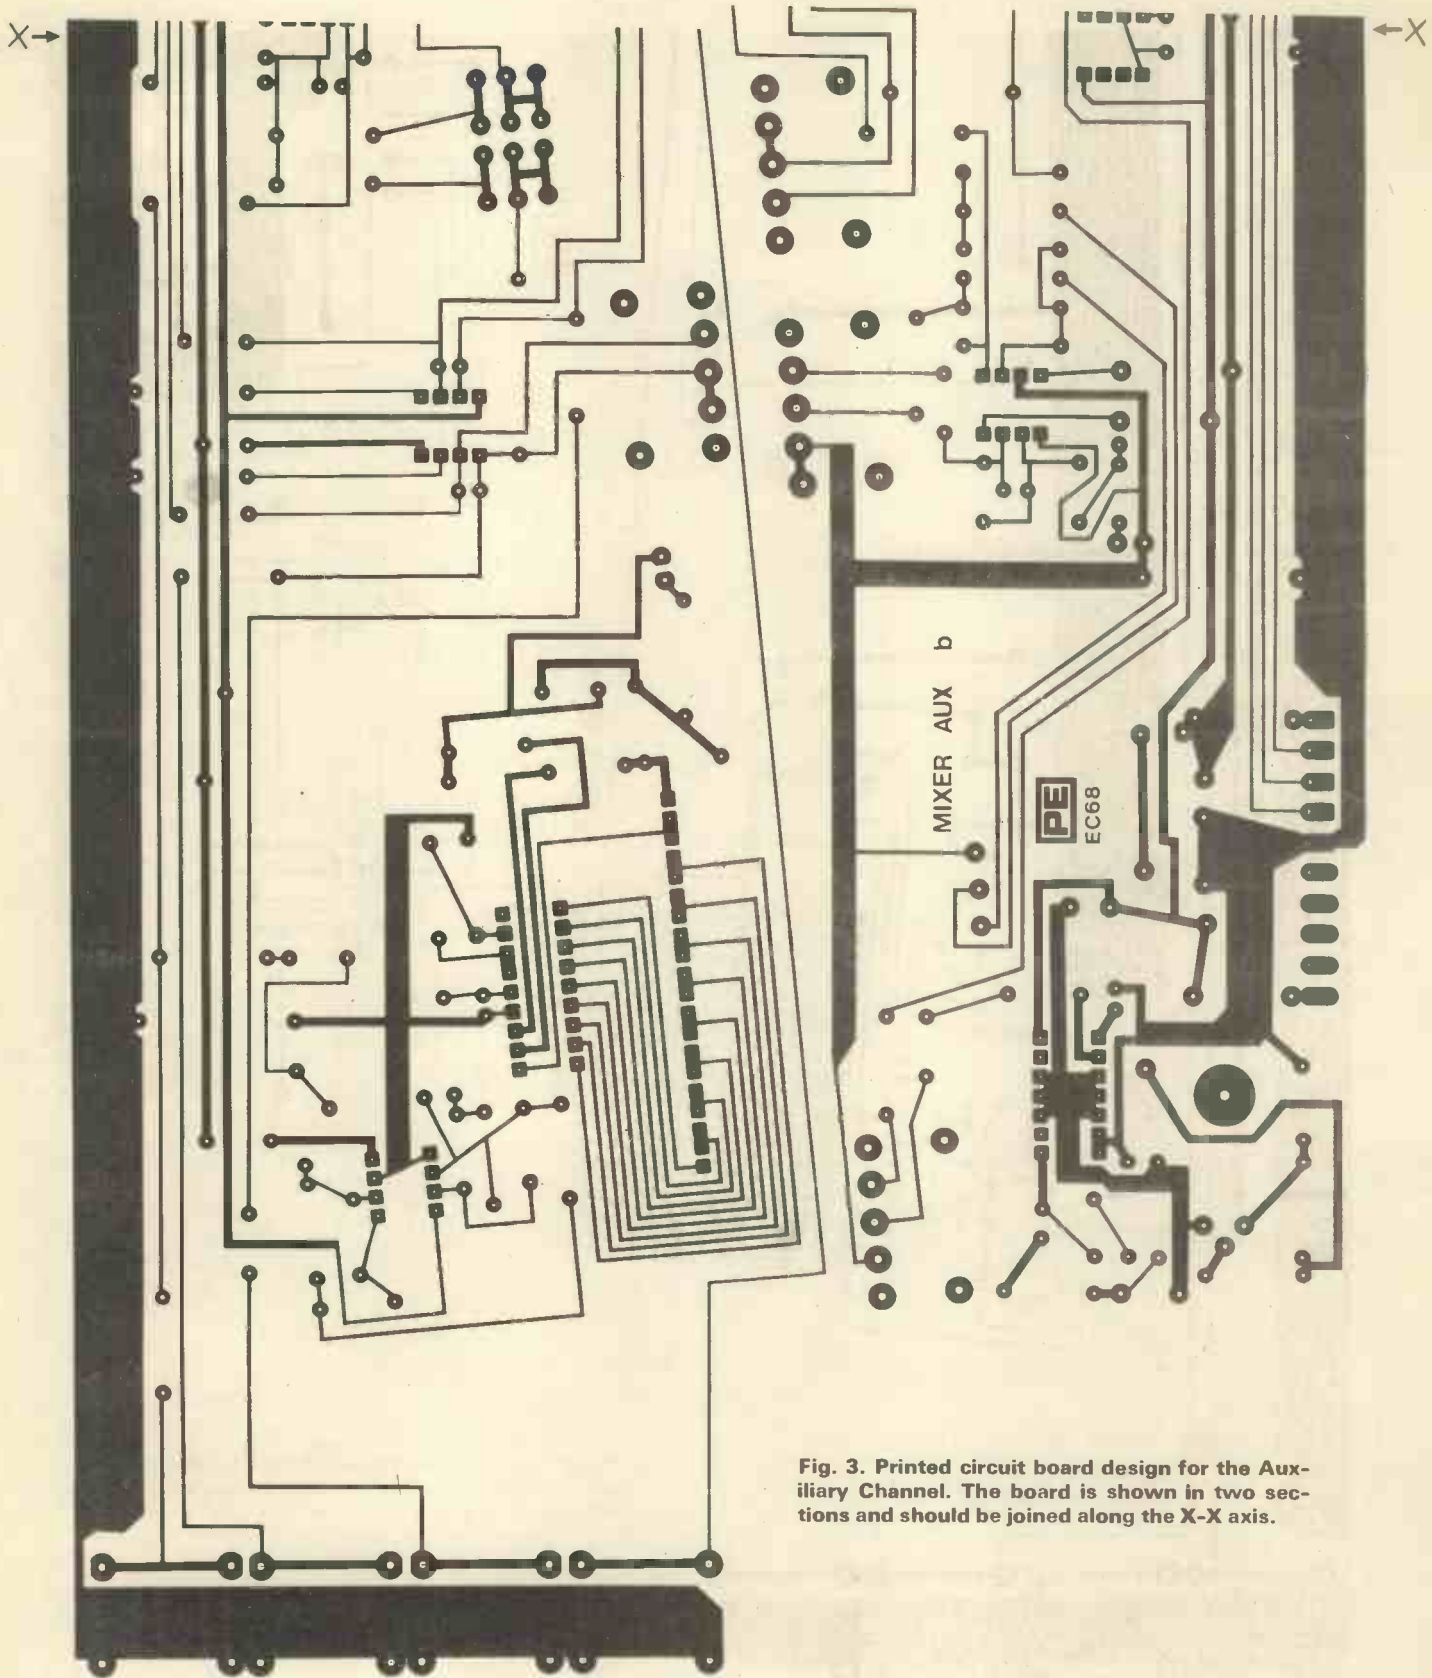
Printed circuit board design for the Auxiliary Channel. The board is shown in two sections and should be joined along the X-X axis.
